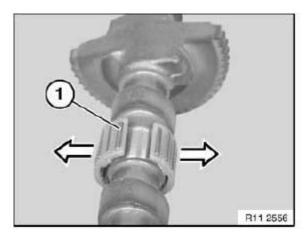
Removing Needle Bearing Courtesy of BMW OF NORTH AMERICA, INC.
